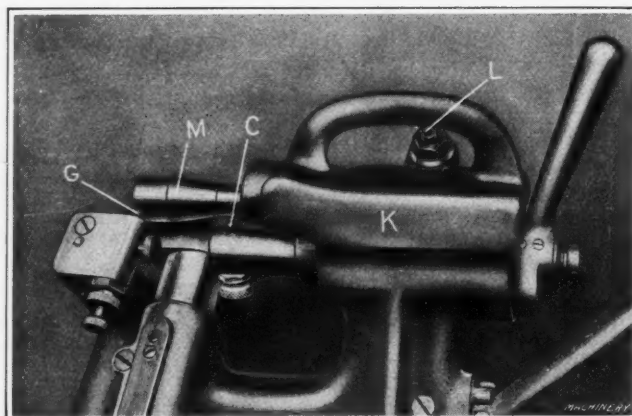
Attachment used in connection with Wheel Truing Device shown in Figs. 27 and 28 for setting Diamond Tools
